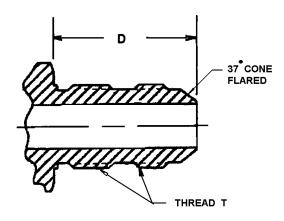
Type Z-fitting end per SAE-AS4396 style H bulkhead flared.
